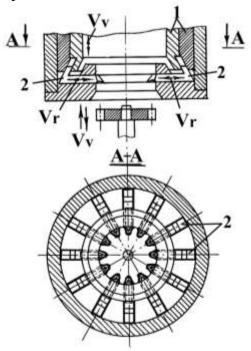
Gear cutting by multiple tool slotting head: 1-gear; 2-radially arranged tools
